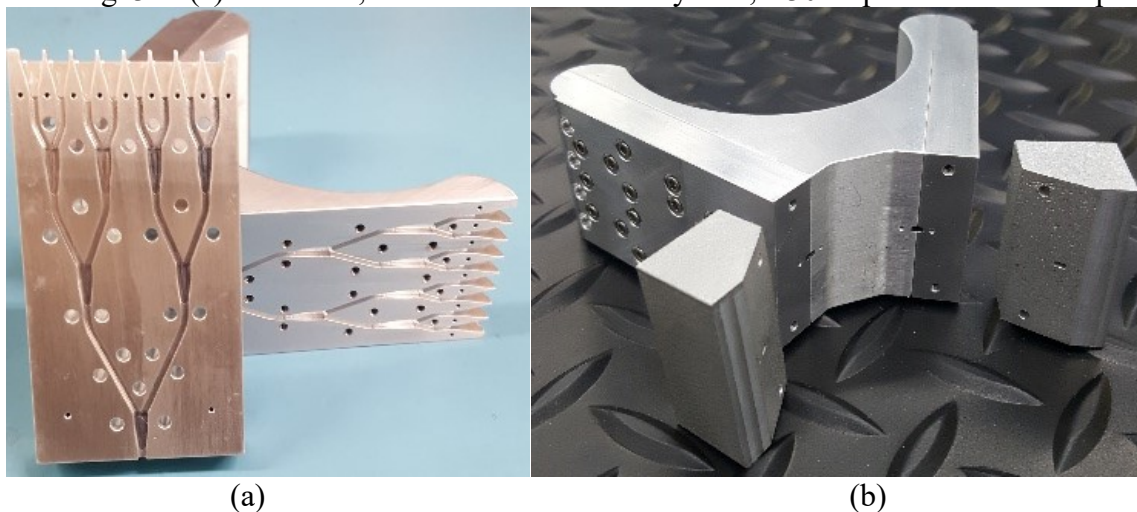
Views of mid-assembly 8 element array system, showing (a) array feed geometry detail, and (b) DMLS input pieces prior to surface flattening and assembly.
